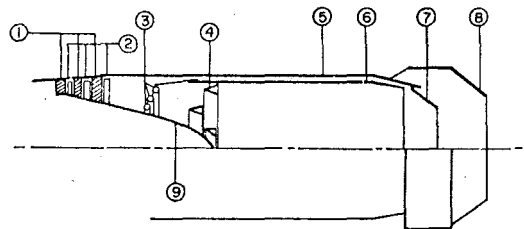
Sketch of General Electric J-79 afterburner. (1) Turbine nozzles, (2) Turbine blades, (3) fuel injection rings, (4) three annular V-gutter flame holders, (5) afterburner case, (6) perforated liner, (7) and (8) primary and secondary nozzle flaps, and (9) diffuser inner cone.
